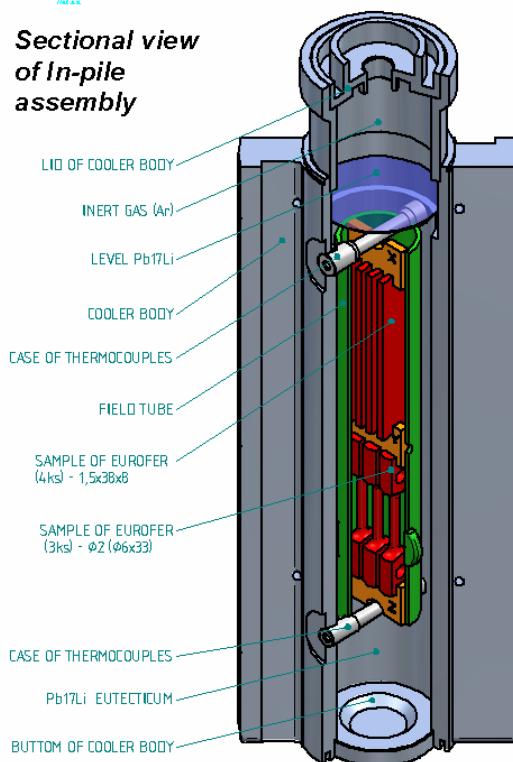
Principle design of Pb-Li in-pile rig extracted from Pb-Li and cleaned in molten sodium
